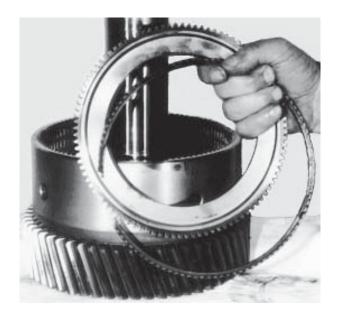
Clutch Backing Plate and Retaining Ring Removed
